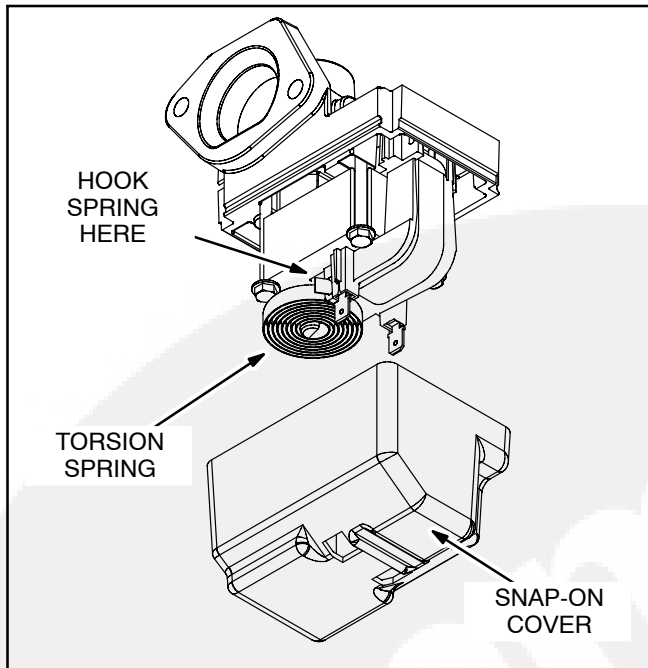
THROTTLE BODY / GOVERNOR ACTUATOR
